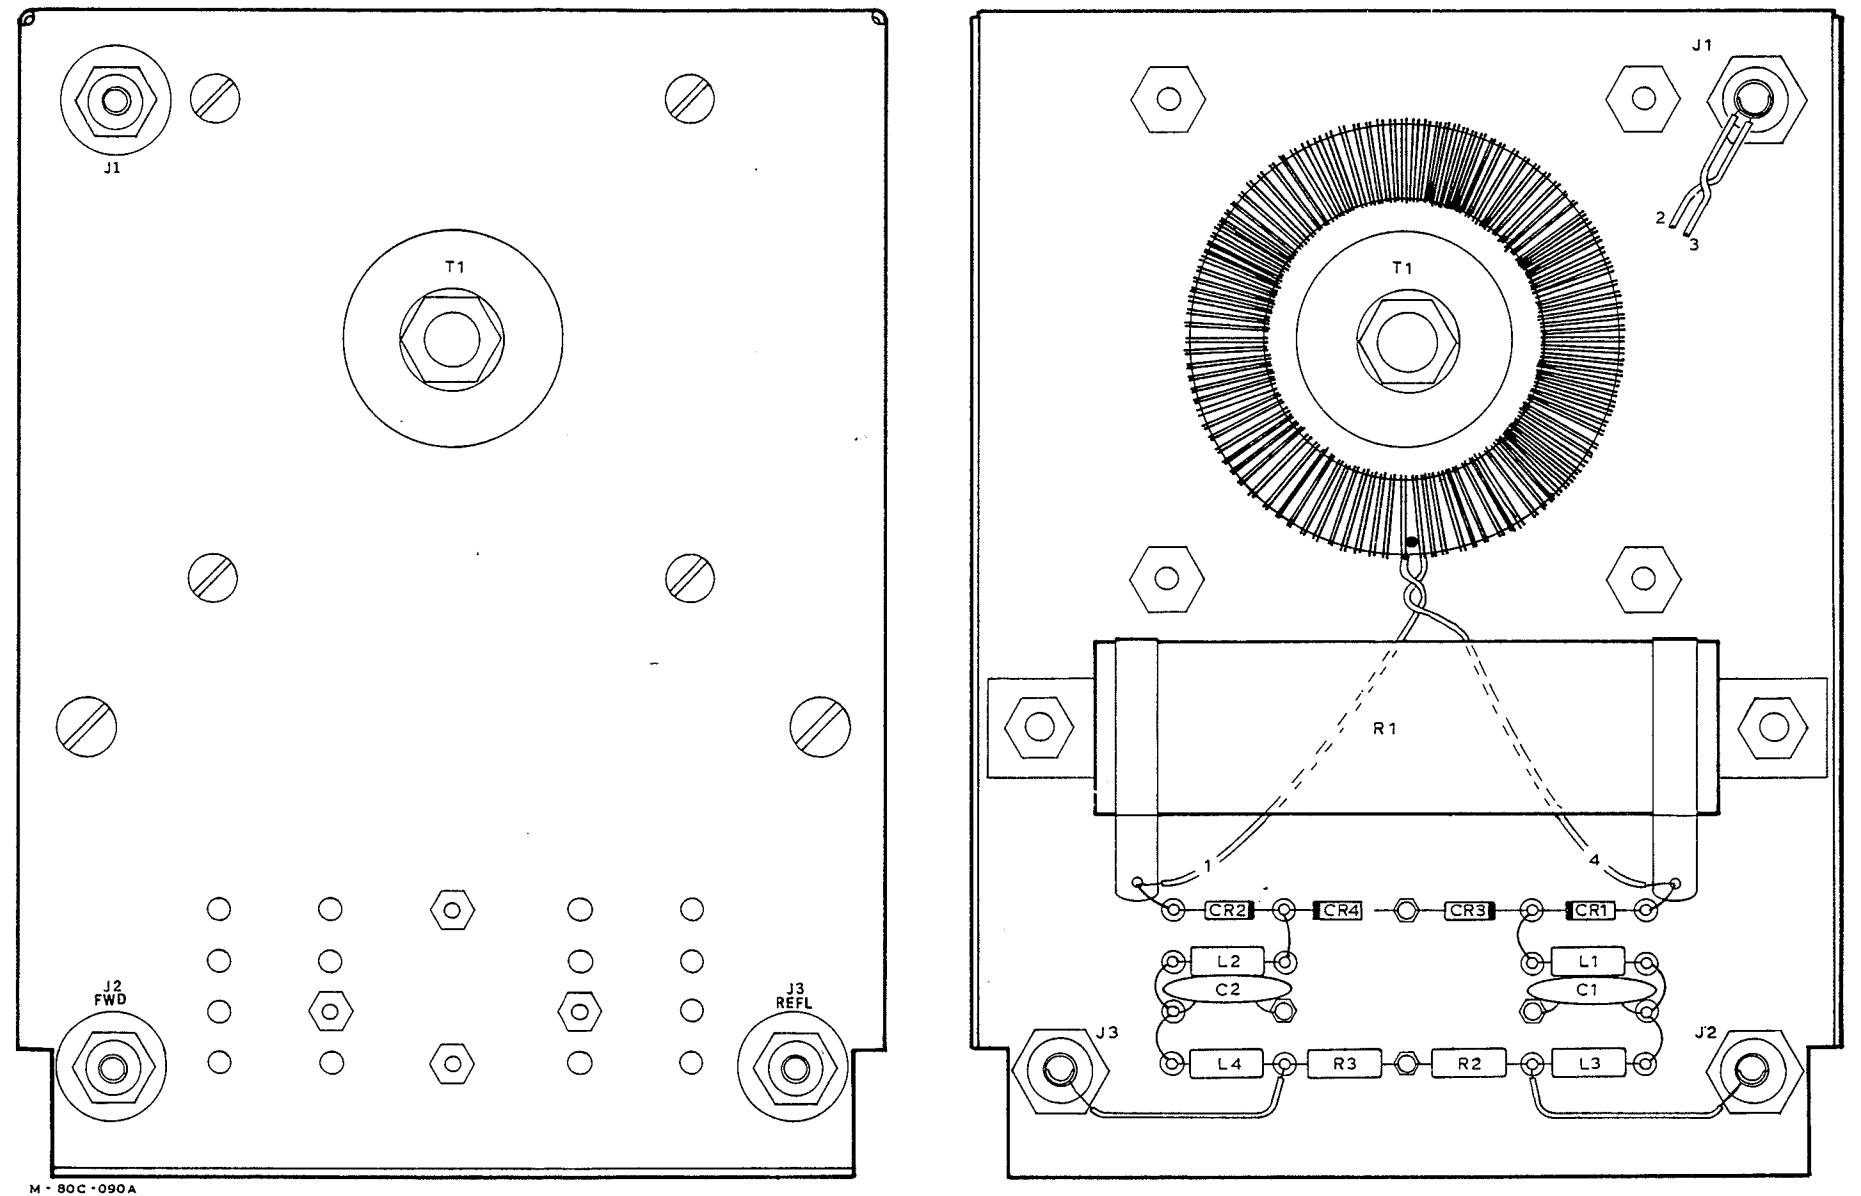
Assembly Detail - NAFP12 Forward/reflected Power Probe
